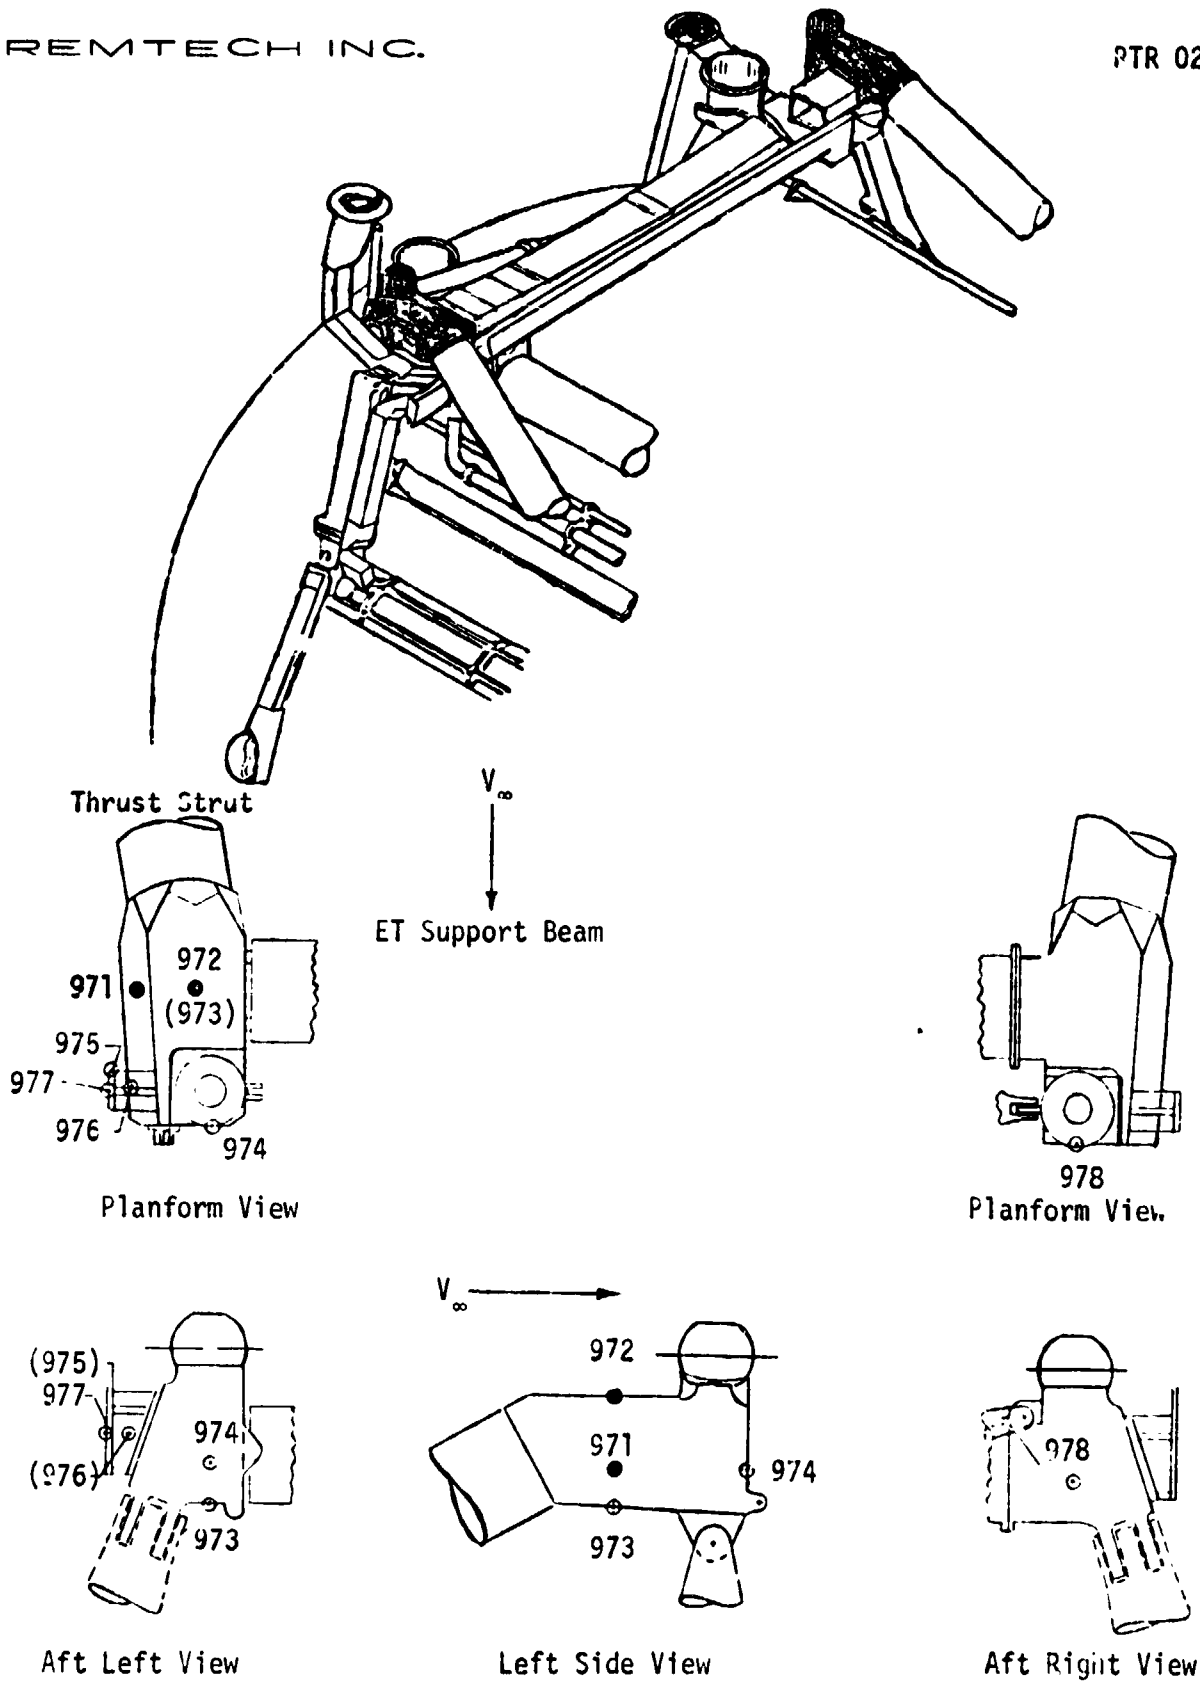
ET/Orbiter Aft Ball Fitting Design Body Point Definition
